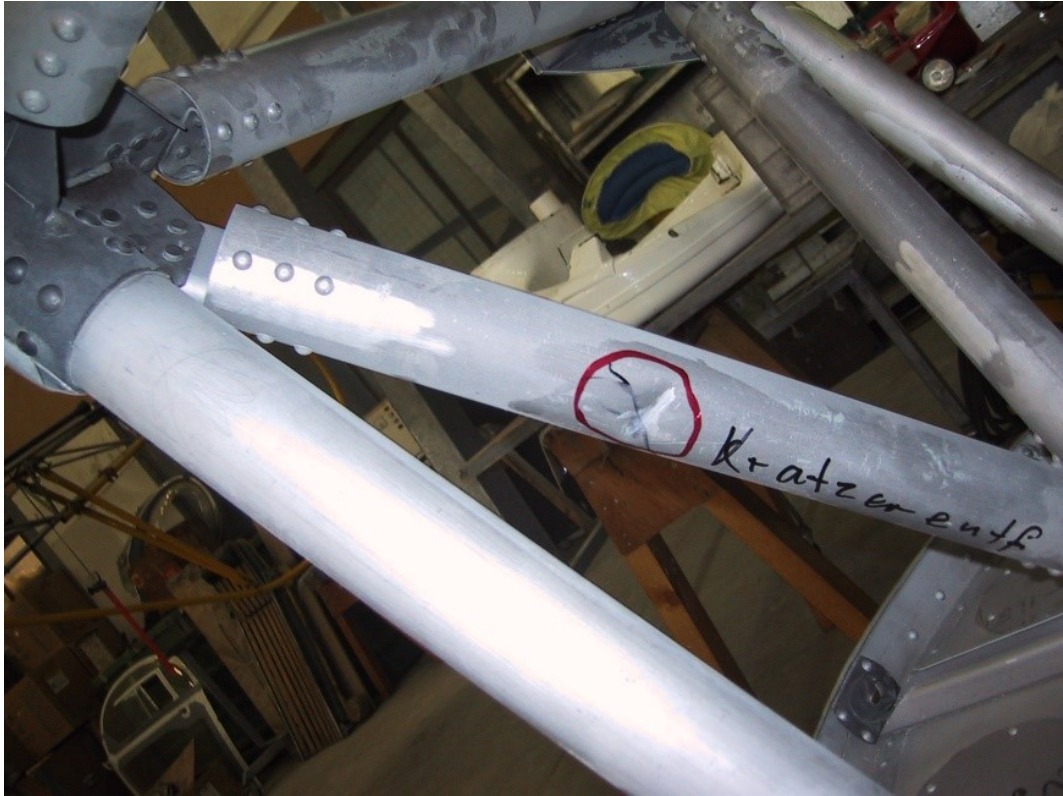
Damaged strut tubing (diagonal tube). Photograph provided by Ju-Air.
